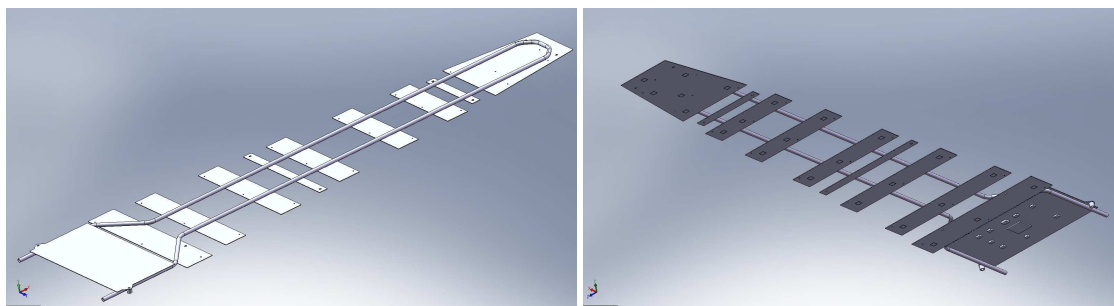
Top and bottom view of the GE1/1 cooling design.
